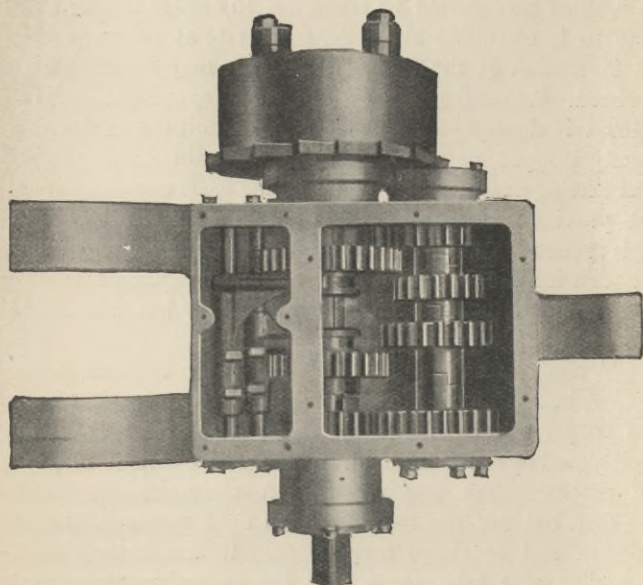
Gear-box, brake drum, and sprag wheel.
